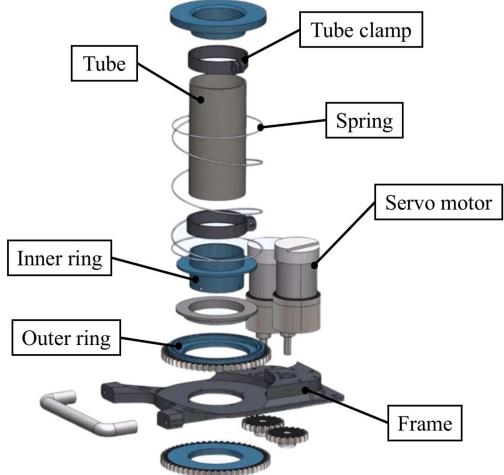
Exploded view of the BerryTwist gripper. The gripper consists of a fabric tube that is manipulated by two servo motors. The split ring and inner ring, in conjunction with the spring, generate a twisting motion to gently envelop the fruit. The outer ring and frame provide structural support.
